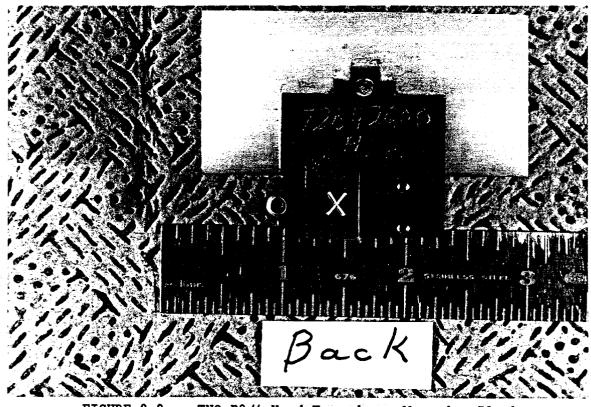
TNO P3/4 Head Transducer Mounting Block
